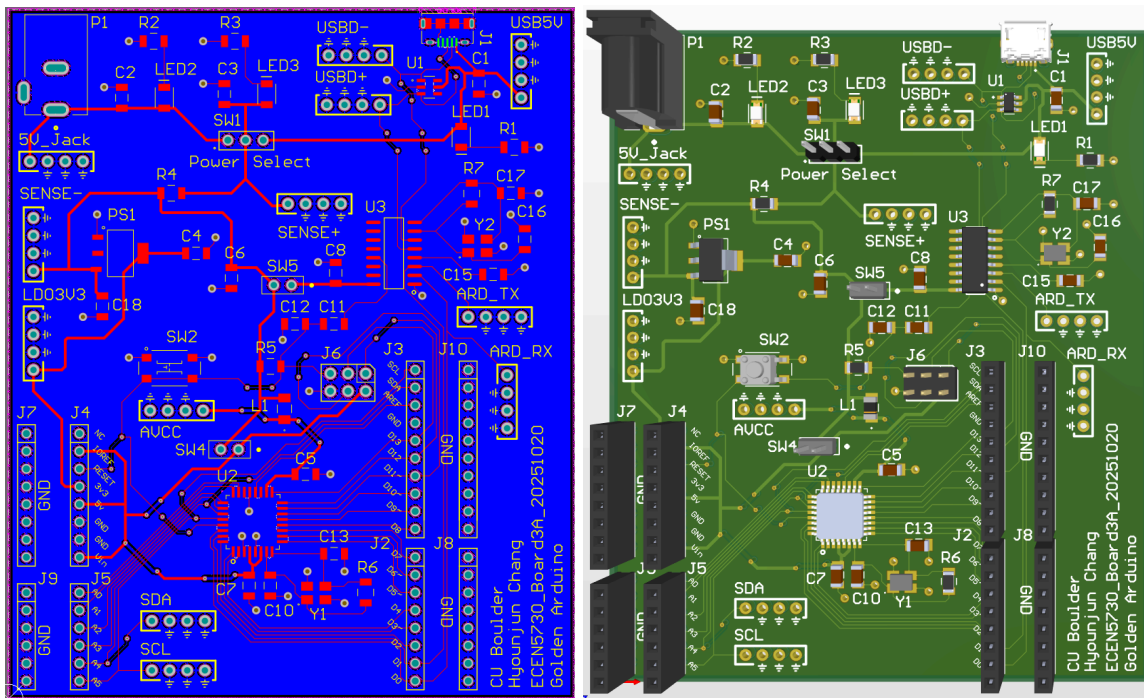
PCB Design on Altium Designer 2D view (Left), 3D view (right)
